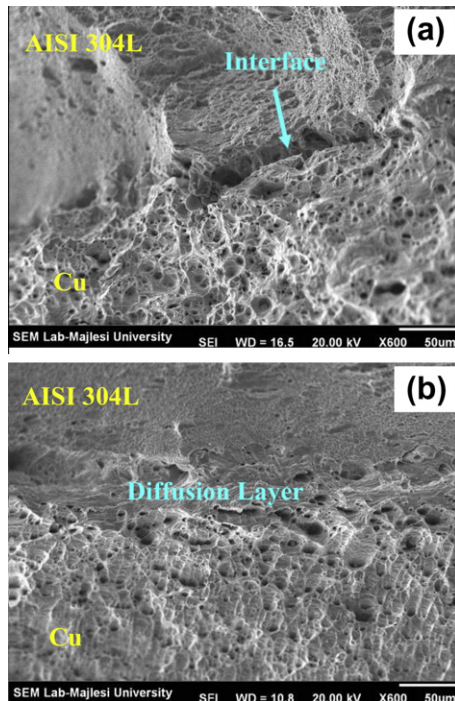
The fracture surfaces of explosively welded copper/stainless steel couple: (a) before and (b) after the heat treatment.
